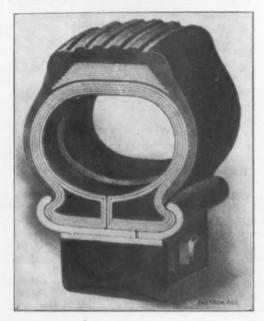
Sectional View of Trident Tire, Flat Thread Type.
